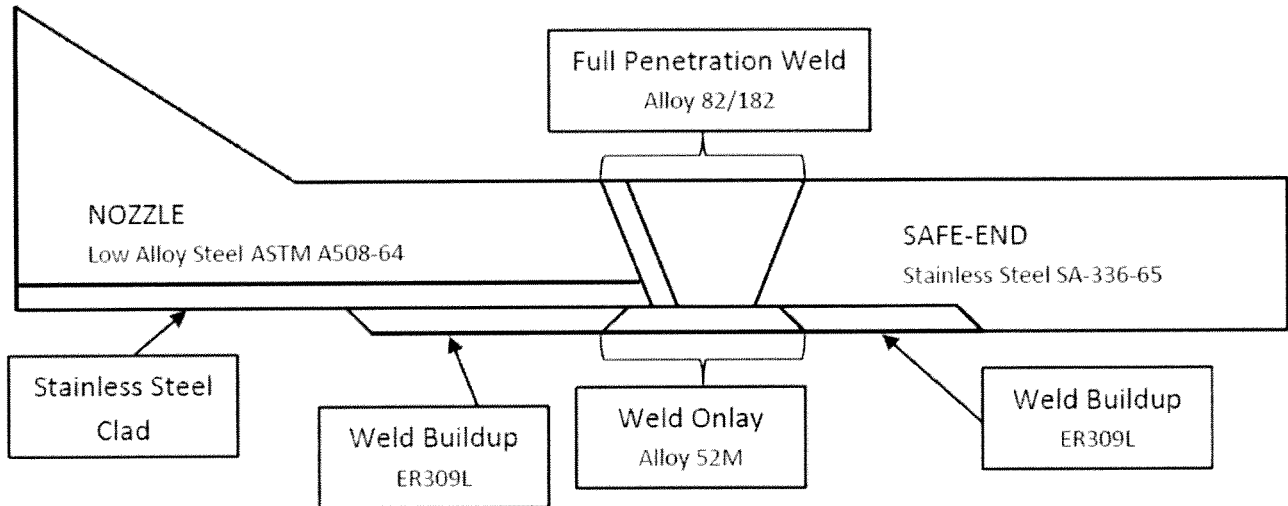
Core Flood "A" Nozzle to Safe-End Weld (RCT0001RC0010BMWELD)
